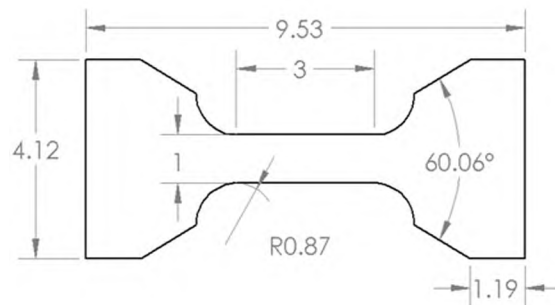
The dimension of mini-tensile specimens. All dimensions are in mm.
